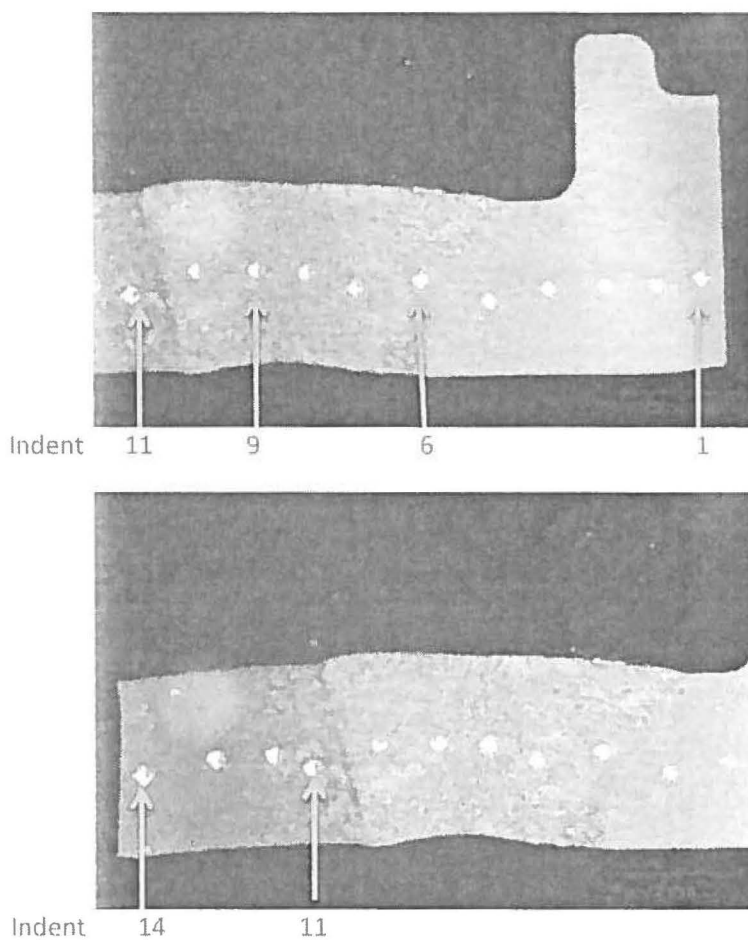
Macro photograph of mounted sample, as-received (S-181218-146).
